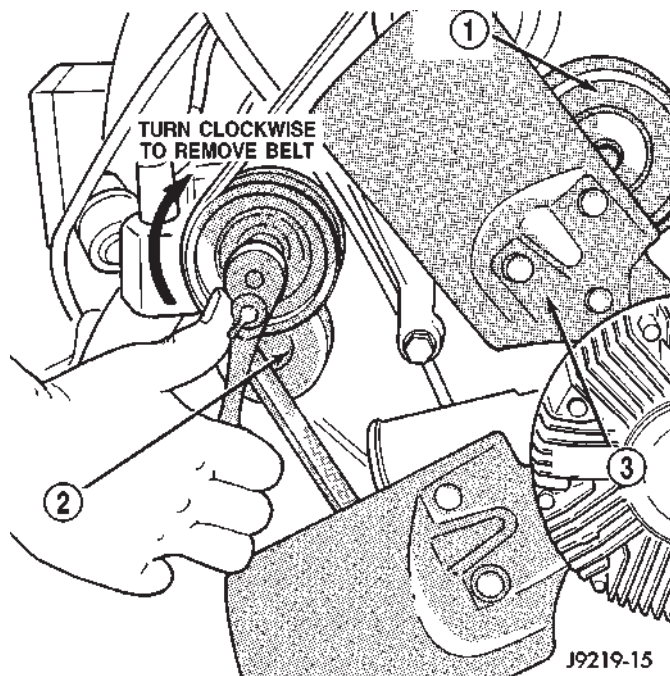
Belt Tensioner—5.2L/5.9L Gas Engines
